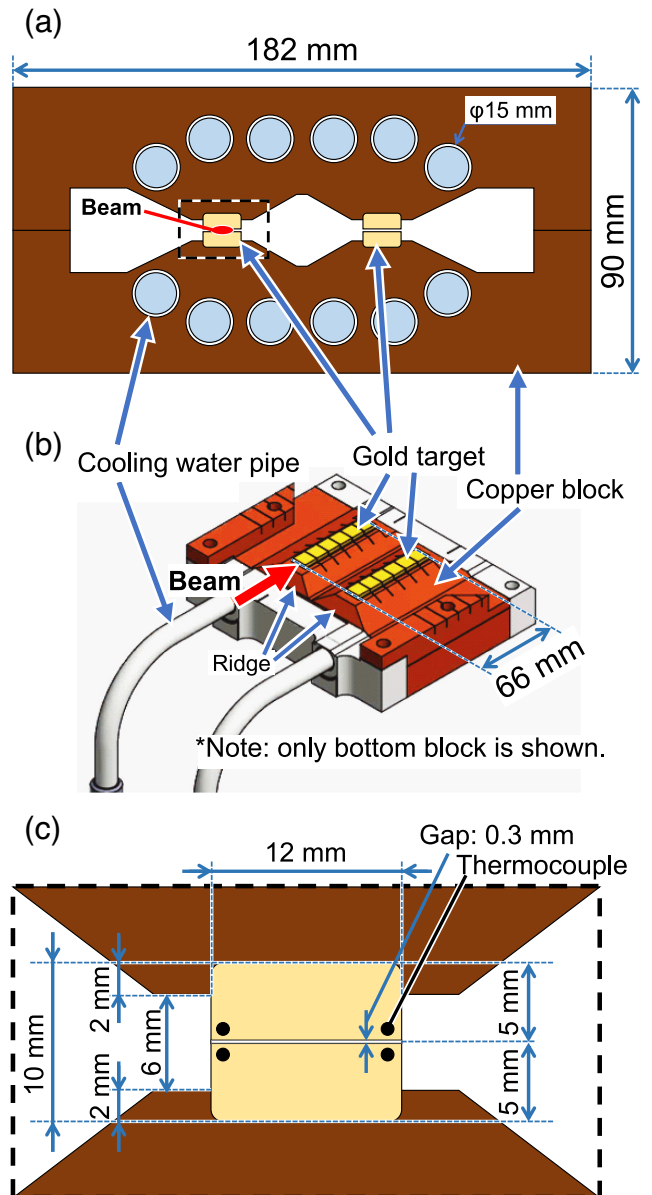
Schematic drawings of new target: (a) cross-sectional view of target, (b) lower half of target, and (c) expanded view.
